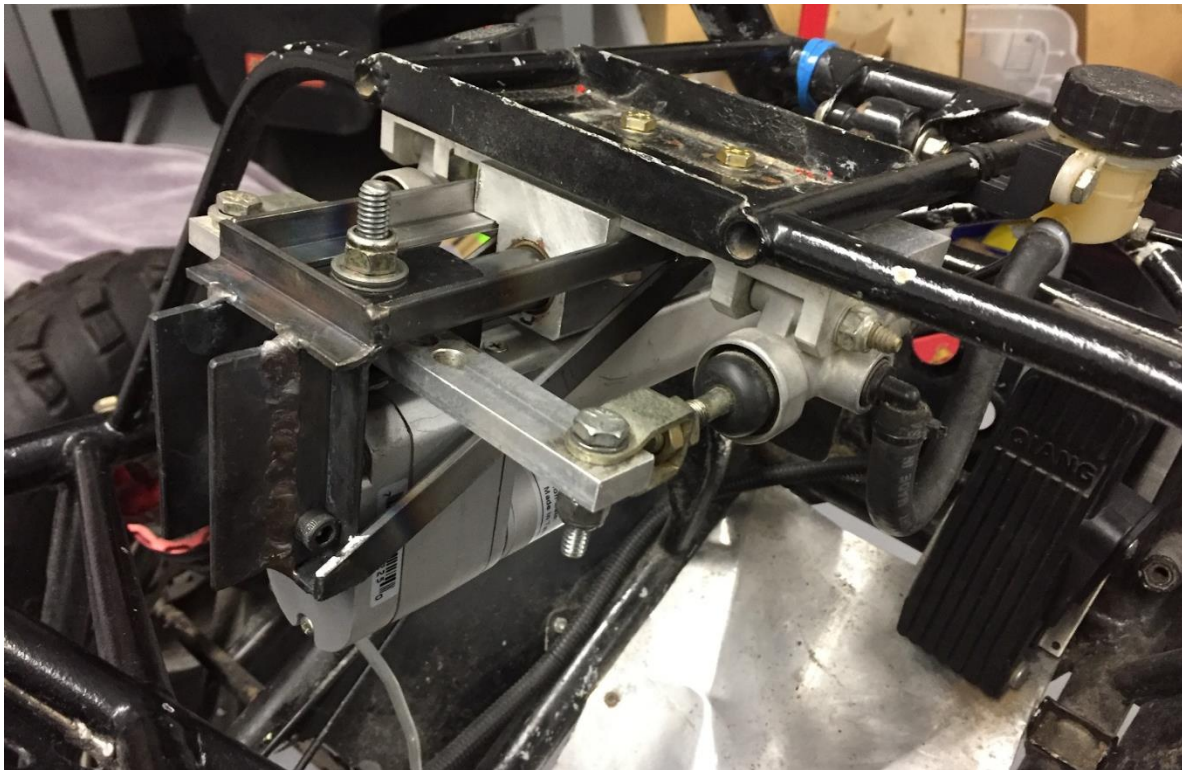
Linear Actuator Mounted to the Vehicle with Welded Steel Frame
